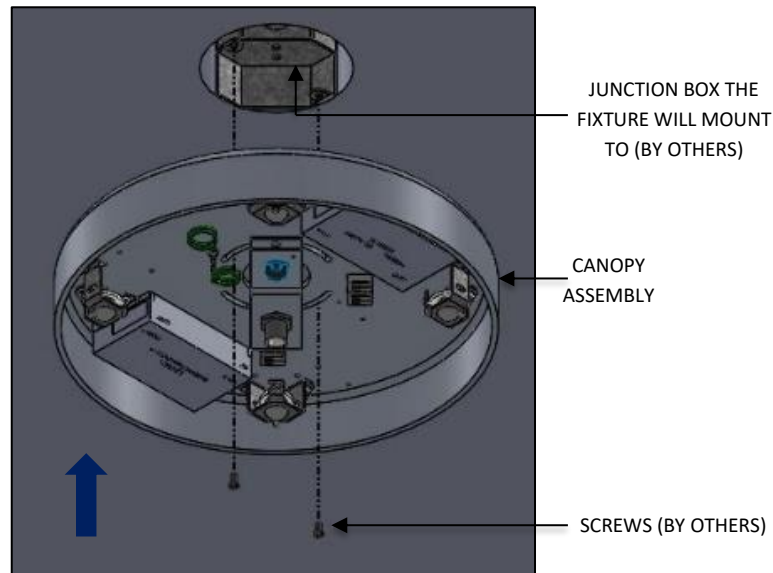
CANOPY ASSEMBLY INSTALLATION
